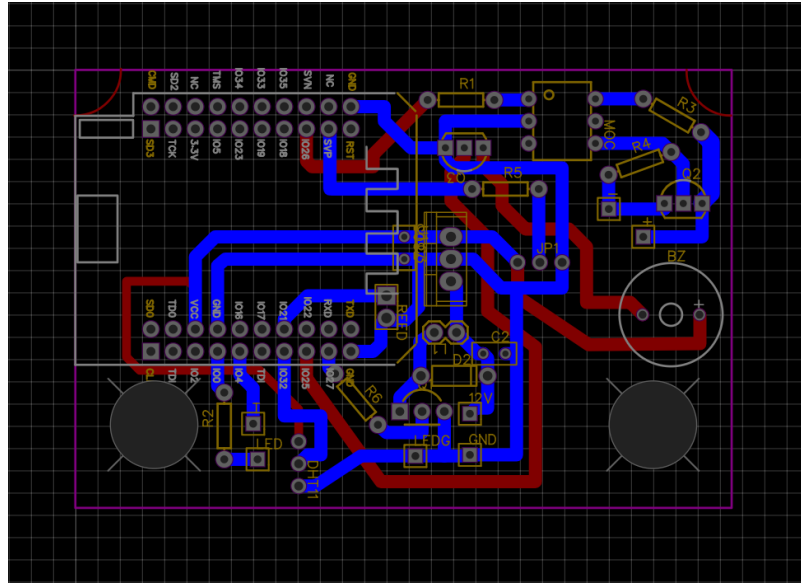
PCB Layout of The Smart Wall Outlet System
